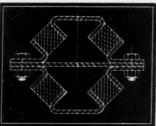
Left—When a single pad of rubber gives insufficient deflection, compression pads may be used in series. Fig. 10—Above—Combination of shear and compression pads. A single design is also possible
